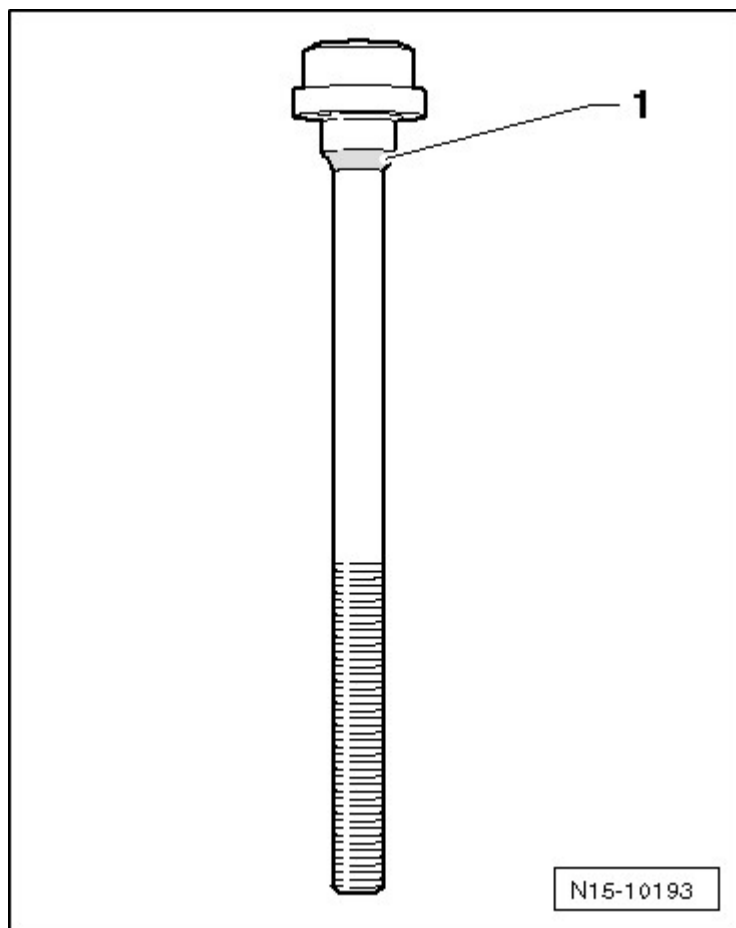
Identifying Sealant Location For Cylinder Head Bolt
